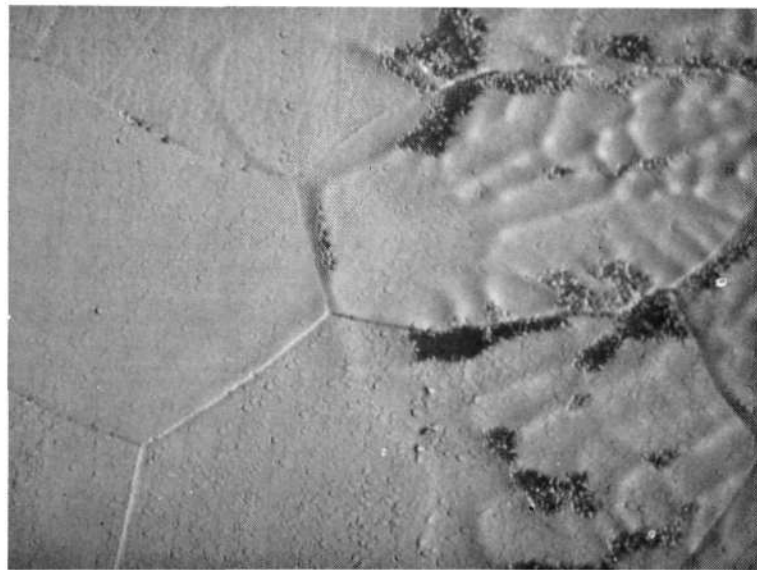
Scanning Electron Micrographs of Fracture Surface of GTA Weld Specimen 7 ; Fractured at -196°C (-320°F).
